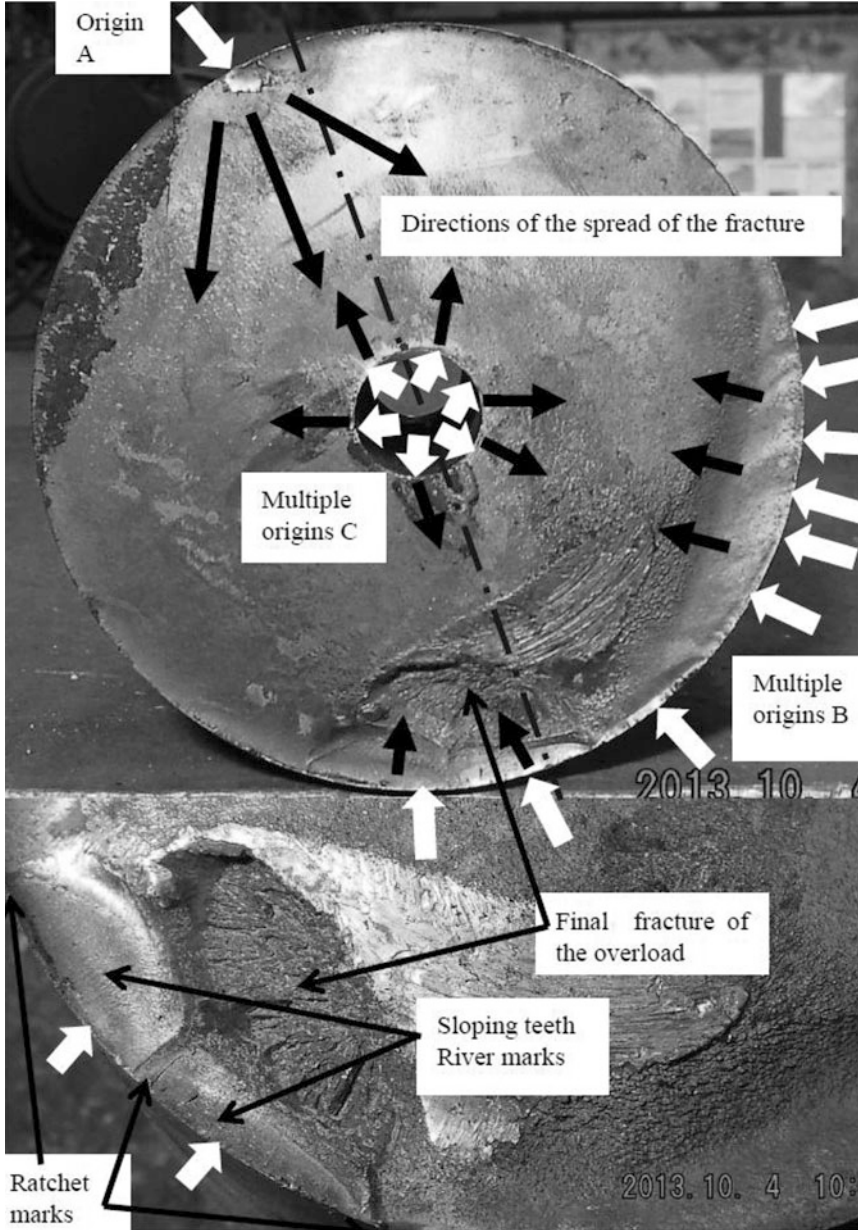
Description of the cross-sectional of the fracture after removing the locking assemble
